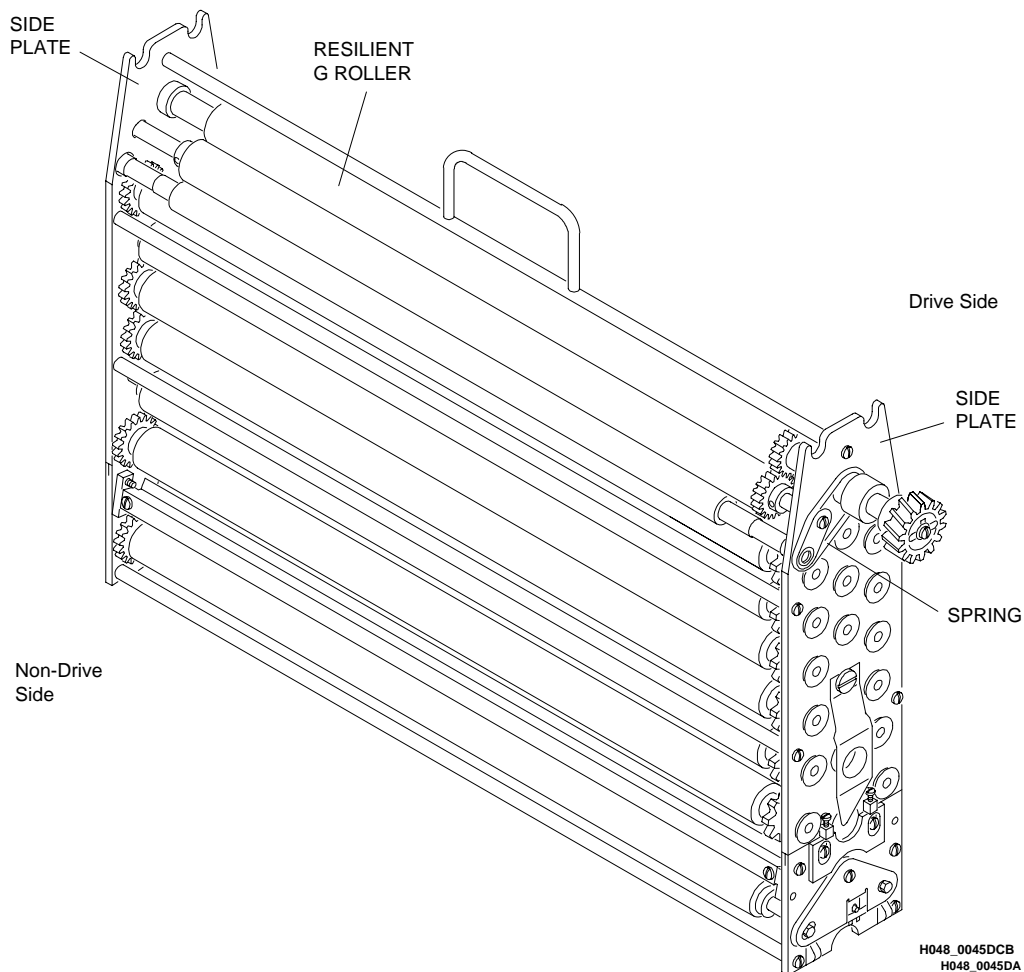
Removing the Resilient G Roller from the Developer or Fixer Rack
